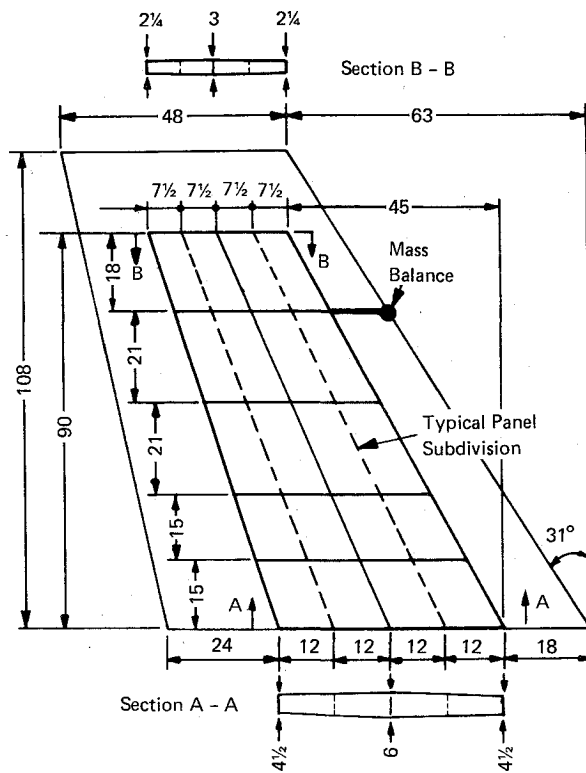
Planform and primary structural arrangement for example wing. Note: all dimensions in inches except where otherwise noted.
